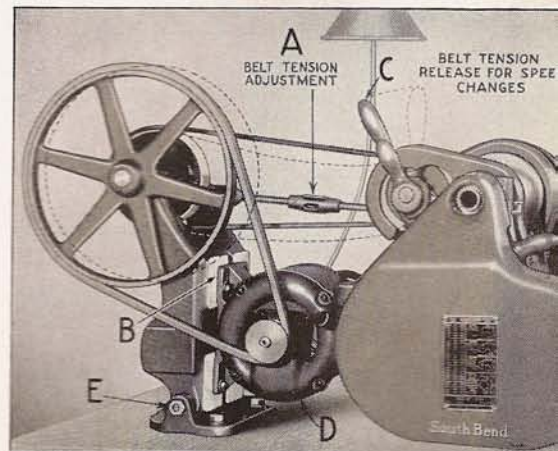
End View of "Workshop" Lathe with Adjustable Horizontal Motor Drive Countershaft
